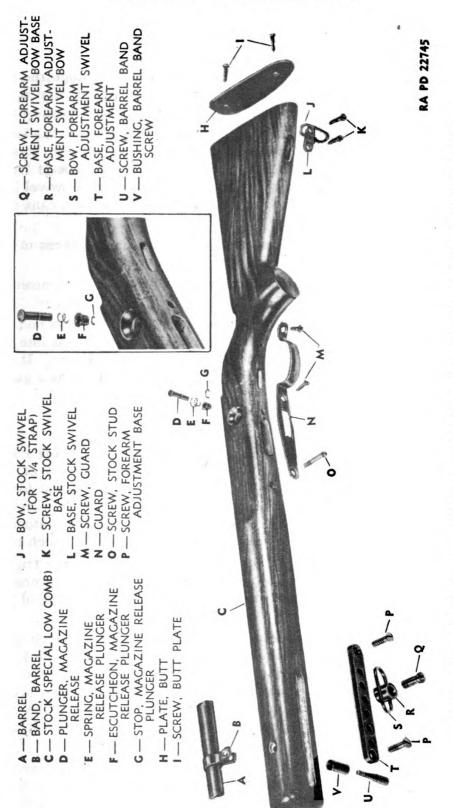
Stock Group of Winchester Rifle, Cal. .22, Model 75 — Exploded View
